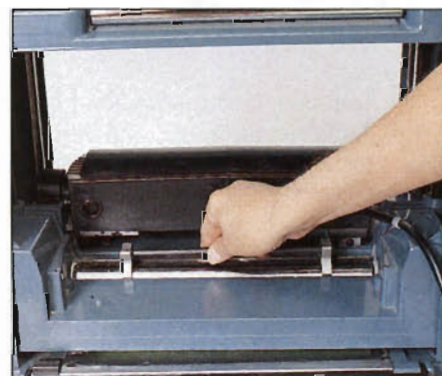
Photo I: A double-ended knife-setting gauge gives accurate results easily on both the Jet and Sears models.
